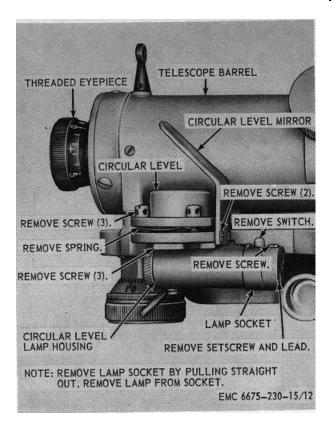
Threaded eyepiece, circular level, and mirror, removal and installation.
